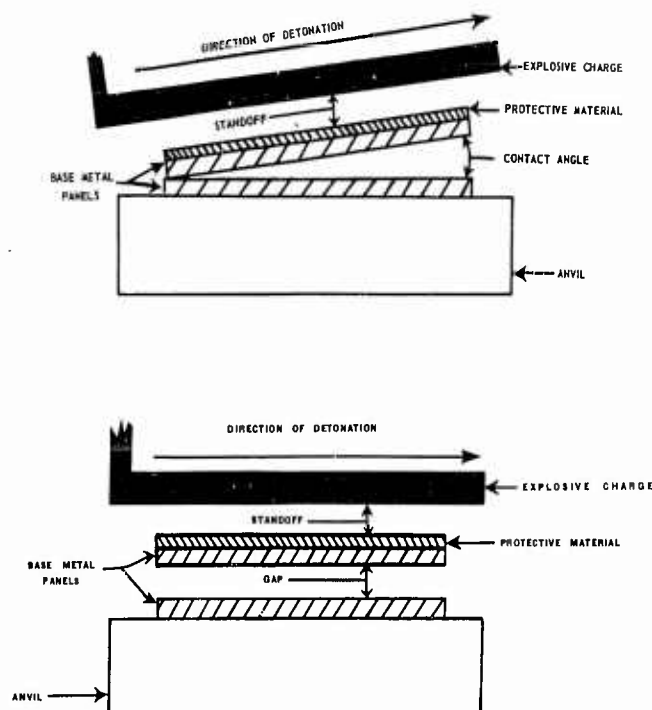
Schematics of explosive welding. A (top): Angular technique; B (bottom): Gap technique
